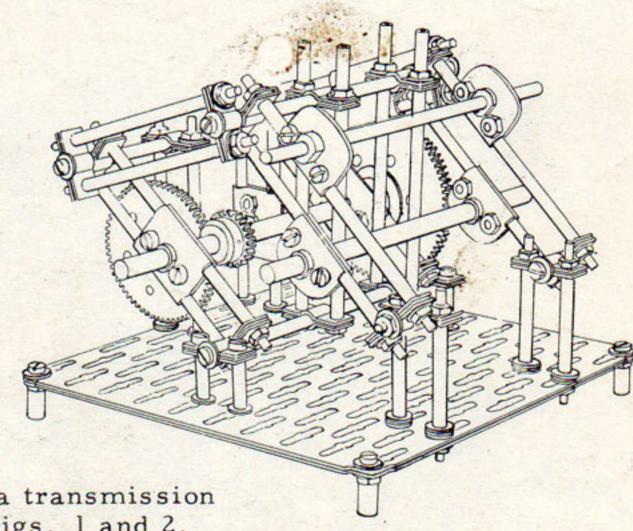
Perspective view of a transmission similar to that in Figs. 1 and 2.
